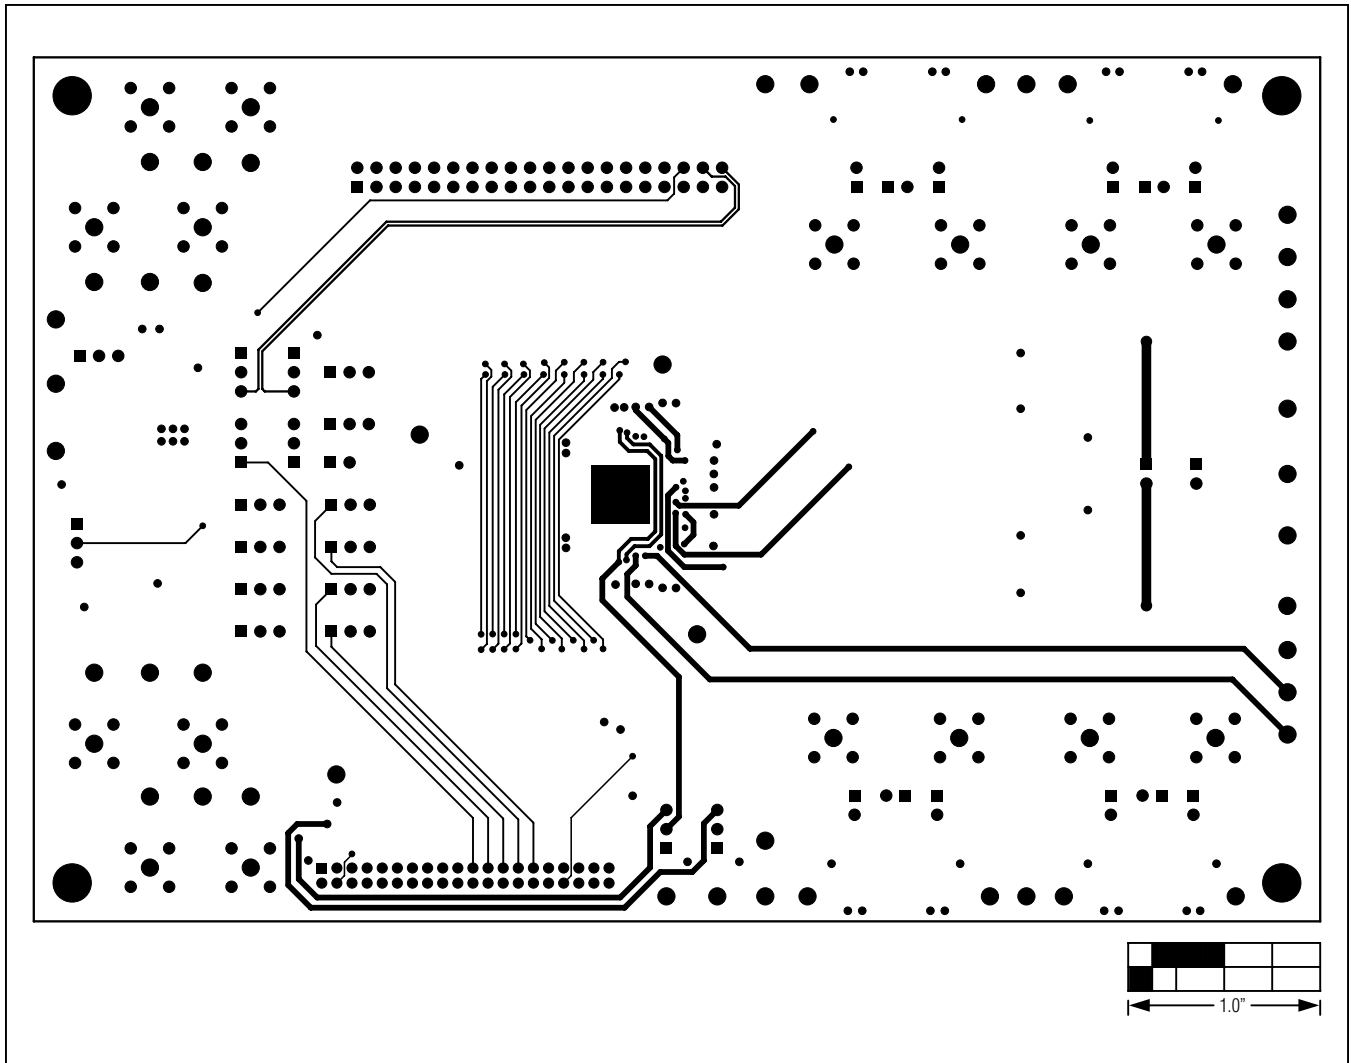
MAX14808 EV Kit PCB Layout—Solder Side
